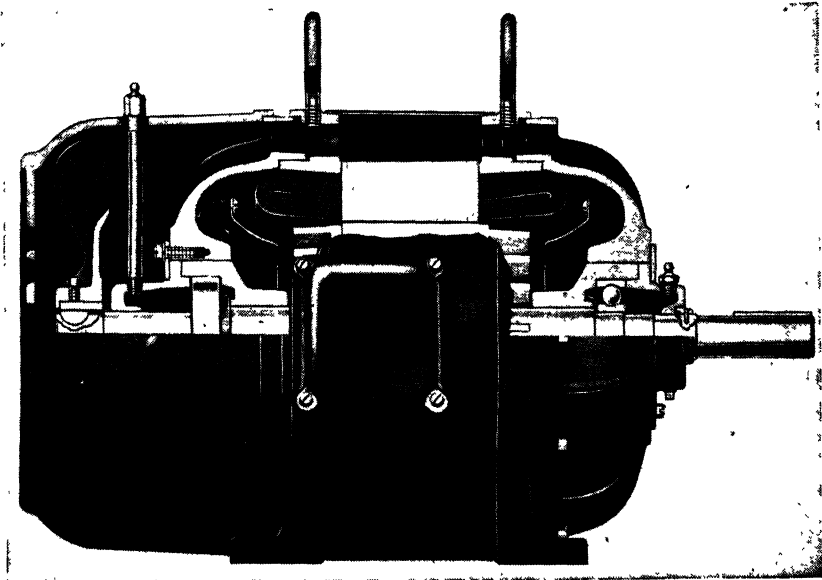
Totally Enclosed Fan-Cooled Squirrel-Cage Induction Motor with Parts Cut Away to Show Construction.
